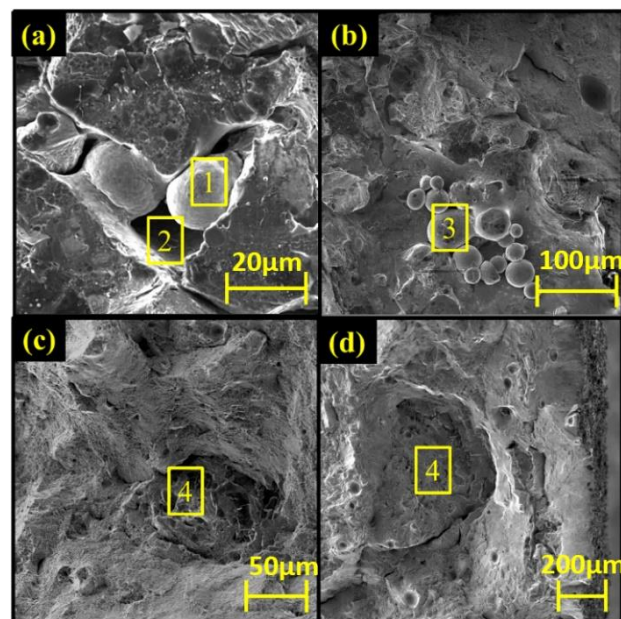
(a) Sample 16A (209.6 J/mm) with the fractured surface outside of its weld zone; (b) Sample 18B (196.8 J/mm) with the fractured surface inside of its weld
